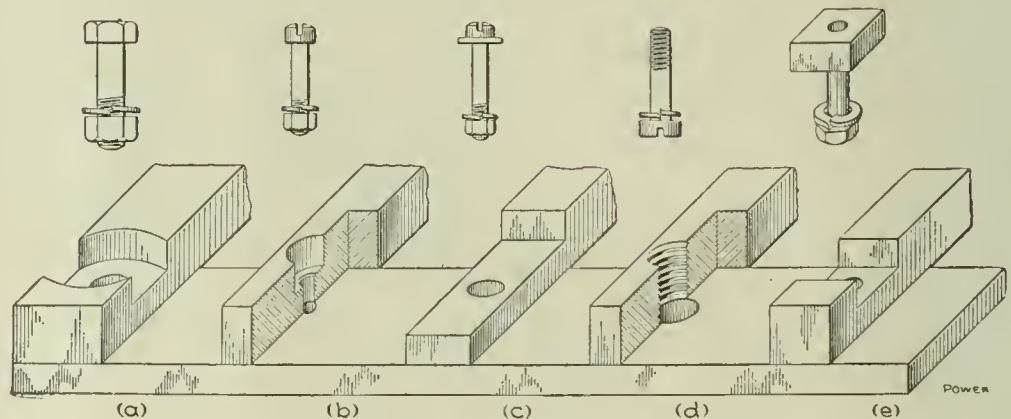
FORMS OF ROTOR-BAR ENDS FOR BOLTING
